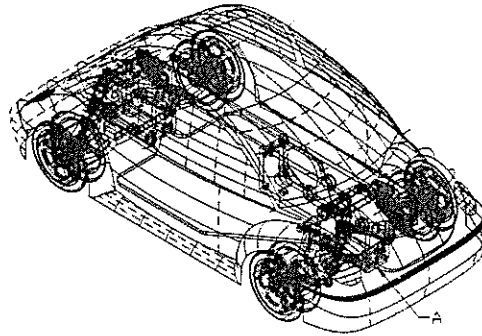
Surface model assembled with solid parts constructed later chapters
